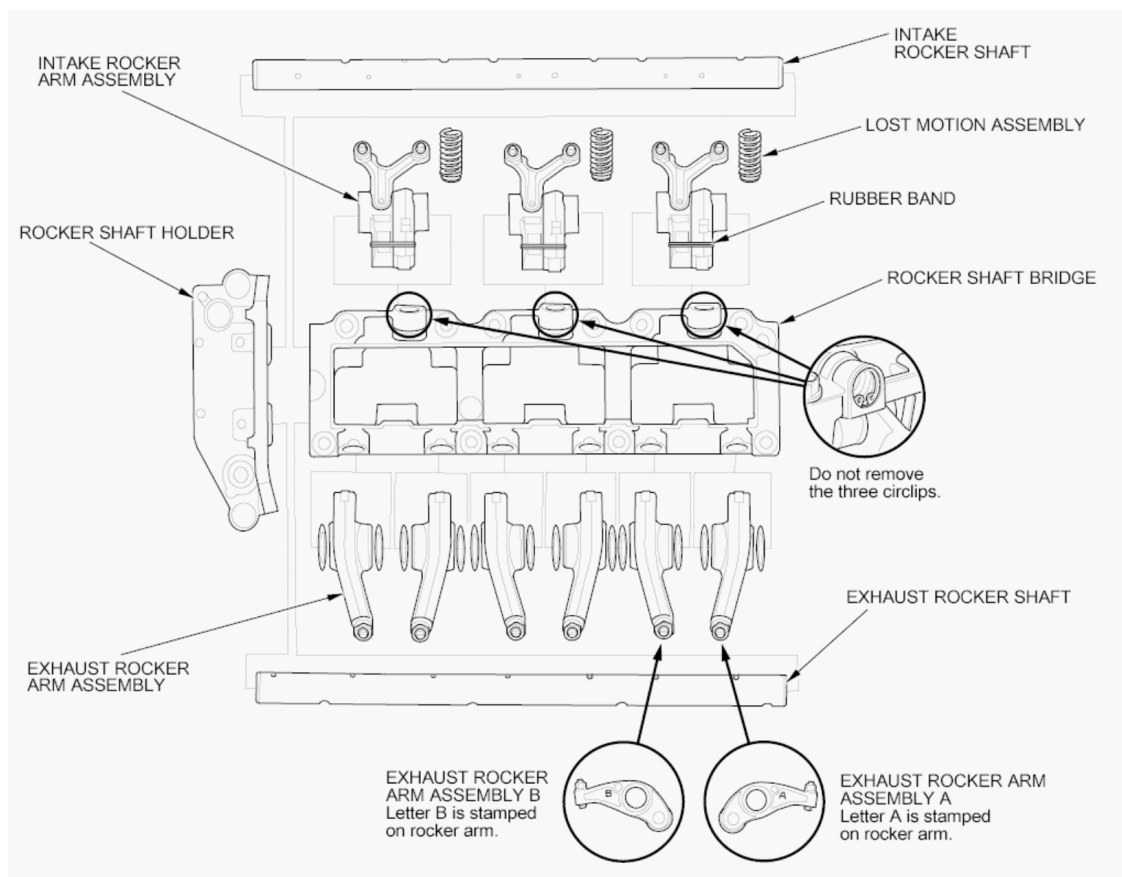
Identifying Rocker Arm And Shaft Assembly Components - Front
